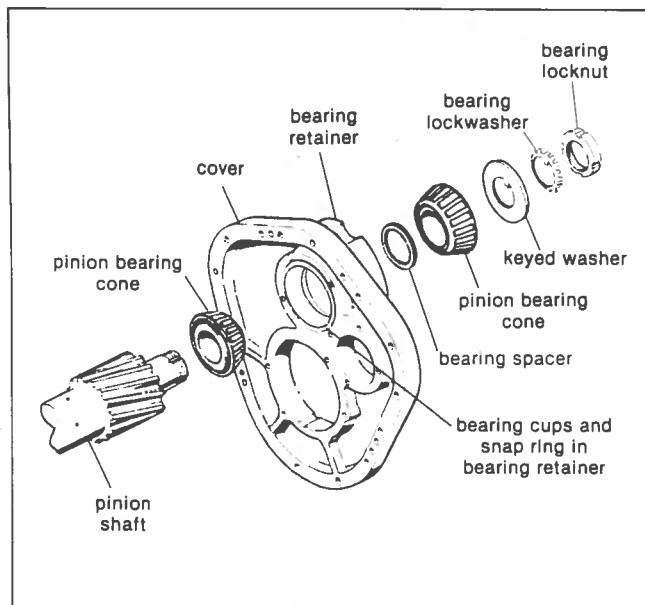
Pinion Shaft, Cover and Bearing Assembly.
